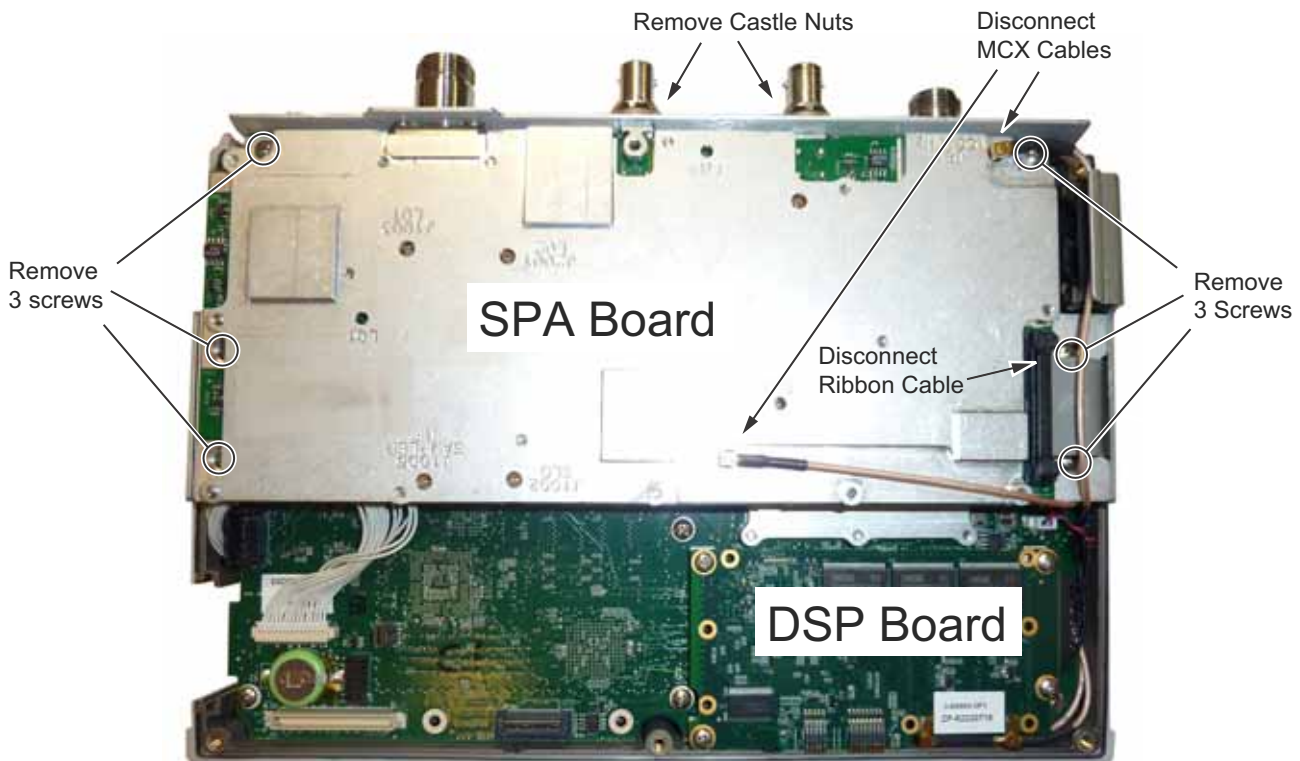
Removing the PCB Assemblies out of the Case
